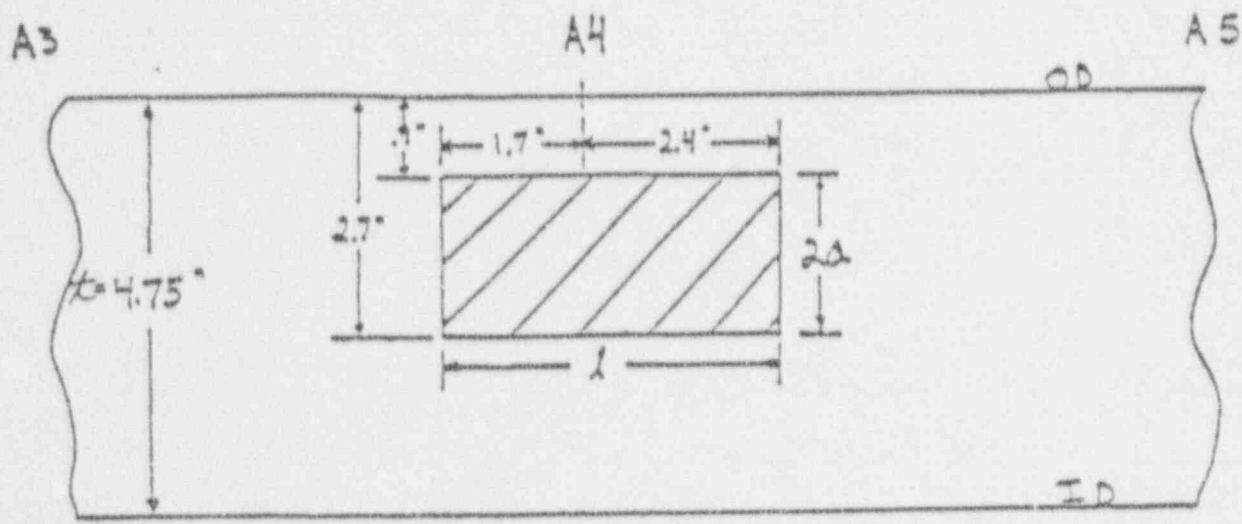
Byron-Jackson Reactor Coolant Pump Weld and Base Material Thickness with Lower Scroll Weld Flaw Indication - ANO-1 "B" RCP - 1988 UT Exam
